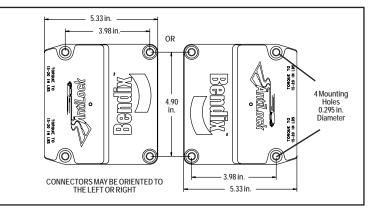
FRAME MOUNT RECOMMENDED SIDEWAYS ORIENTATION
